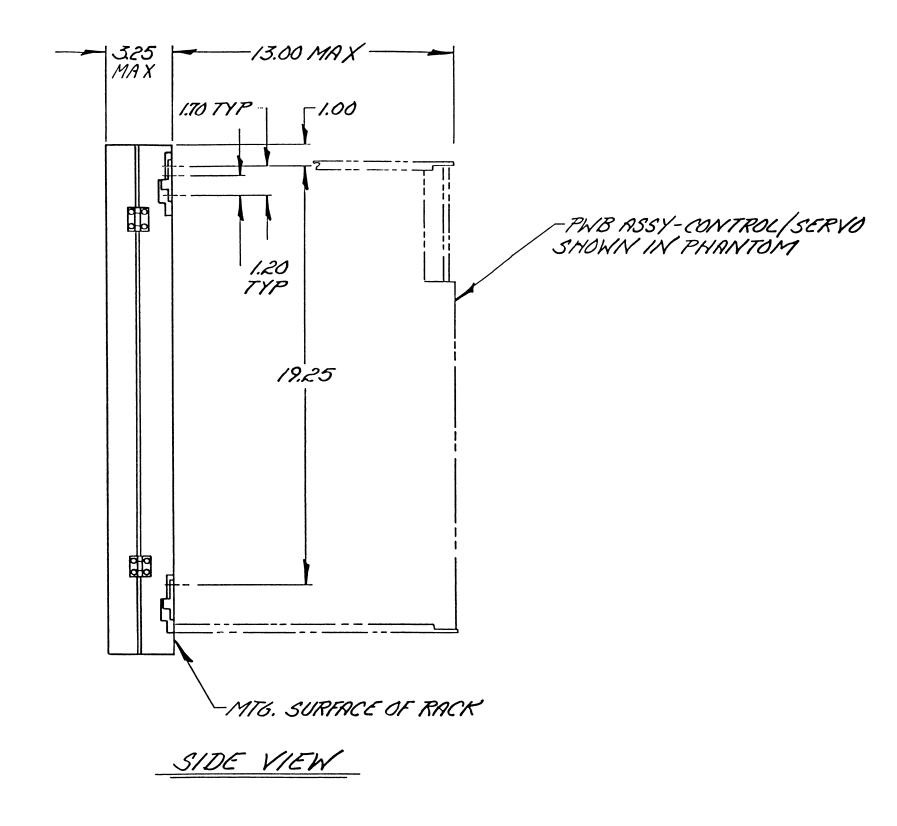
Model 900X Outline Dimensions (Sheet 1)
